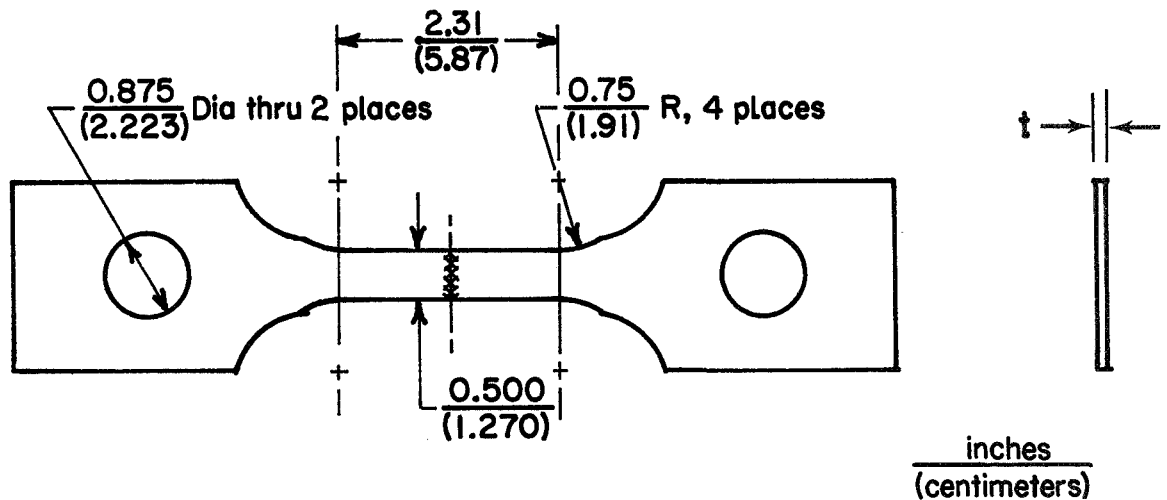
Configuration of Strained Weldment Specimens Remachined for Tensile Test
